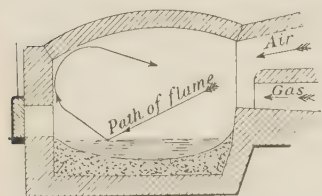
shows a larger view of the furnace hearth, which is made up of brickwork and has a sand bottom. The charging door is at the end opposite the port holes, and suffers rather severely from the cutting action of the flame. There is another door on one side opposite to the tap hole—this is very useful for the inspection of the hearth and for other purposes.
